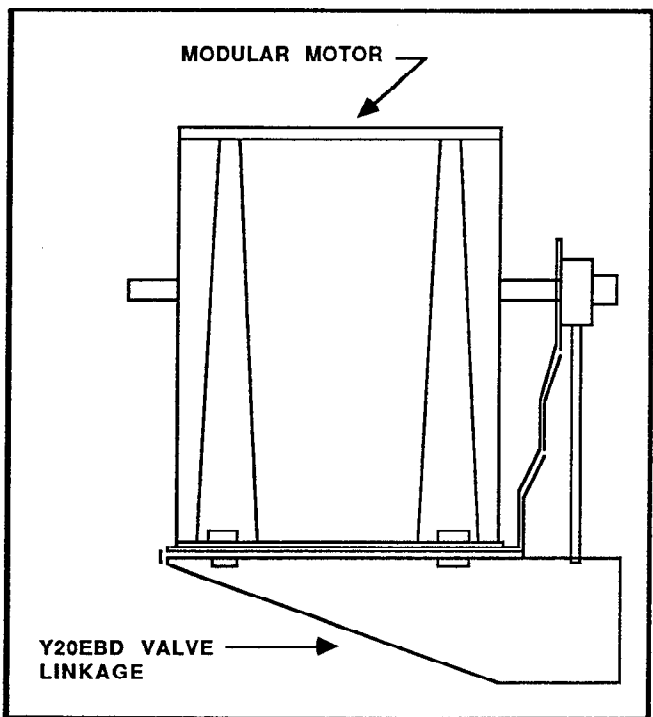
MOUNTING MMR TO JOHNSON Y20EBD VALVE LINKAGE
